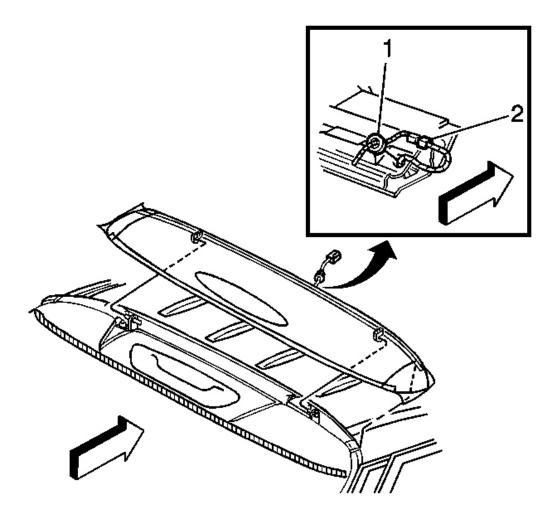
Accessing High Mount Stop Lamp Electrical Connector Courtesy of GENERAL MOTORS CORP.
